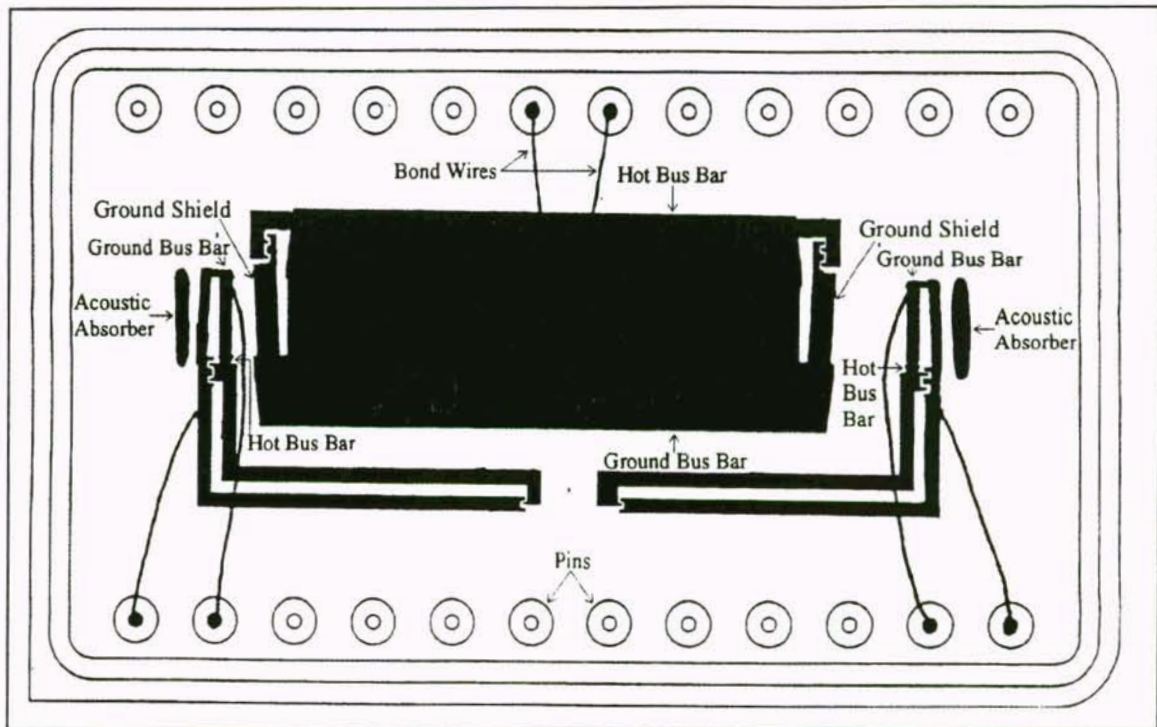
Packaging and wire bonding diagram for the 9 chip weighted stepped chirp code signal experimental SAW devices.
